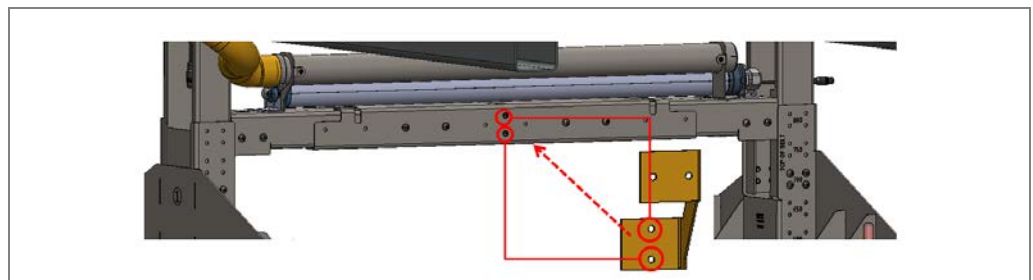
Steel frame: mounting the adapter plate for the measuring wheel encoder
